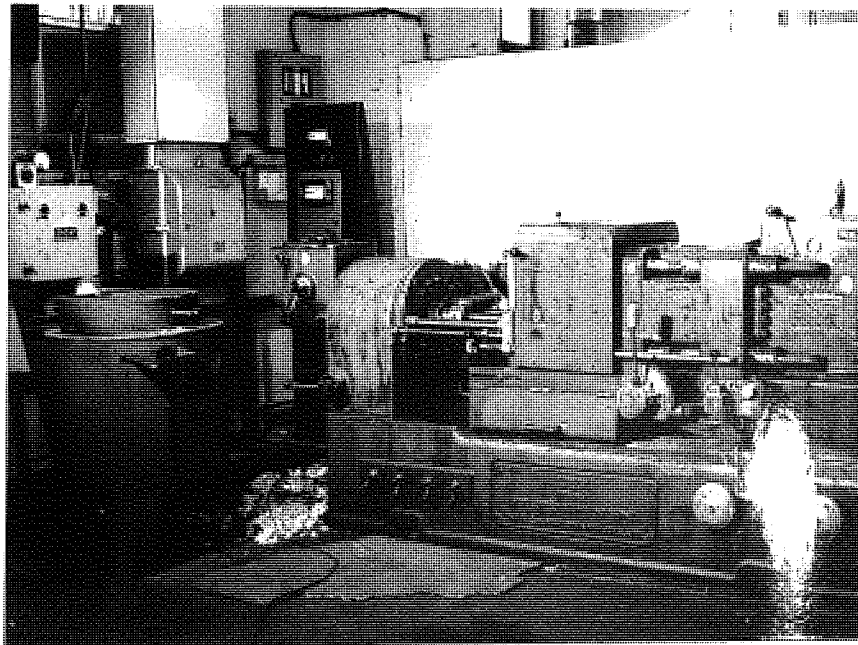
EMB.10, Cold Chamber Pressure Diecasting Machine.
